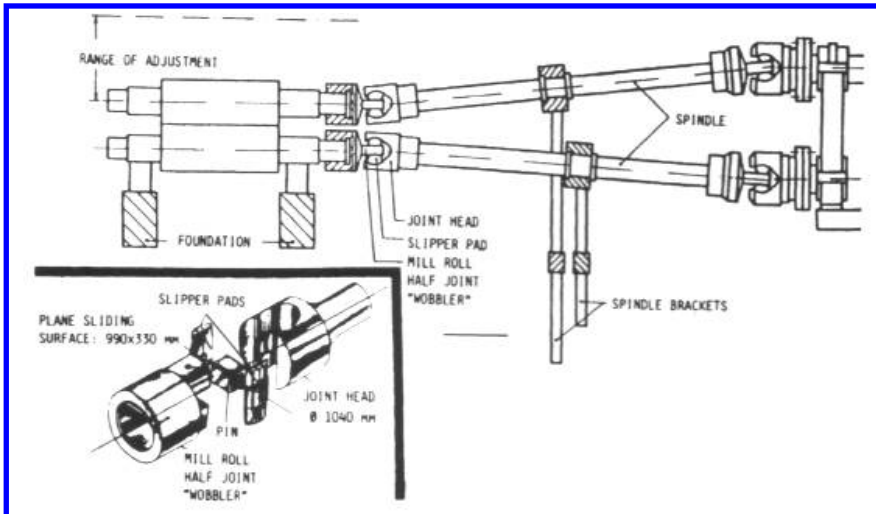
Steel mill roll-drive assembly and the cardan joint (inset). (From Ref. 30, reprinted with permission from ASME.)
